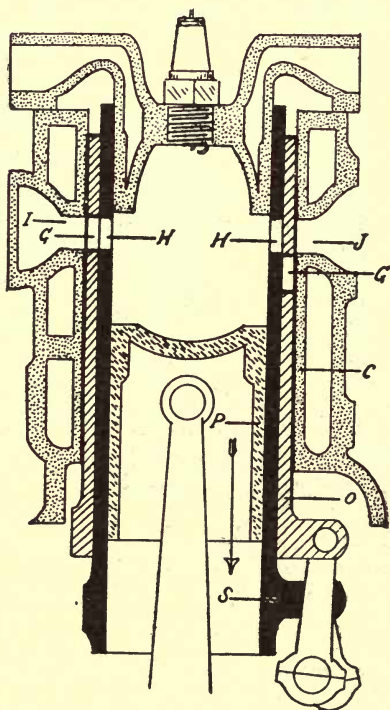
Knight Sleeve-valve Motor; Section to show Operation
